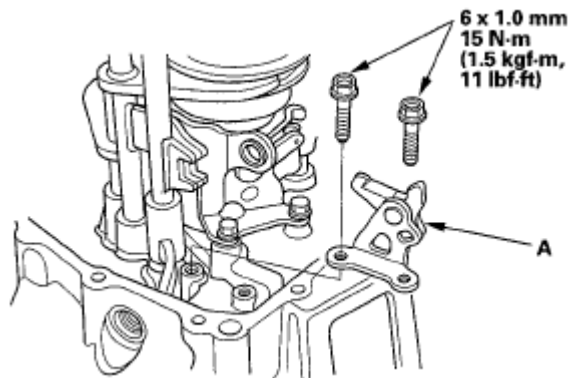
Identifying Reverse Lock Cam With Torque Specification
